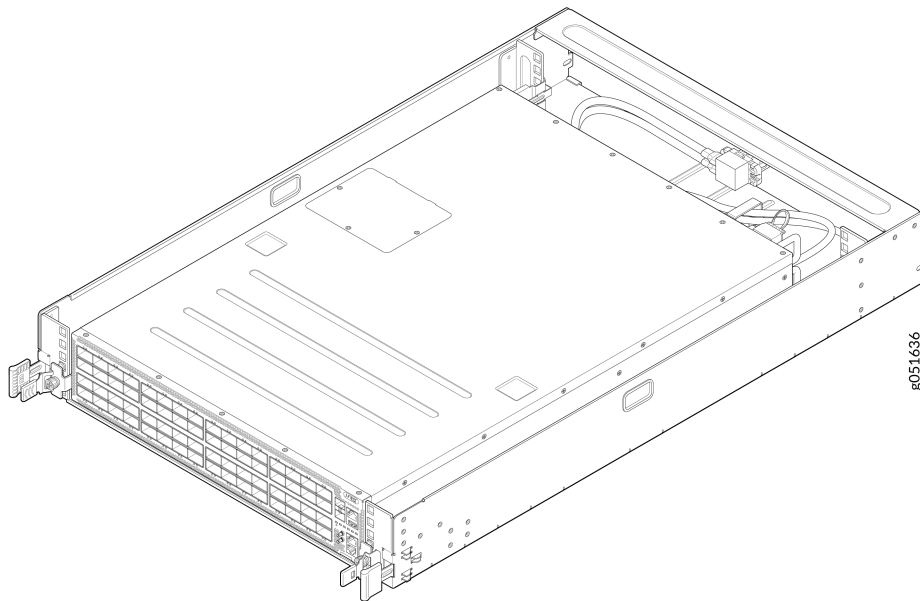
View of the QFX5241-64QD ORv3 Switch-Tray Assembly
